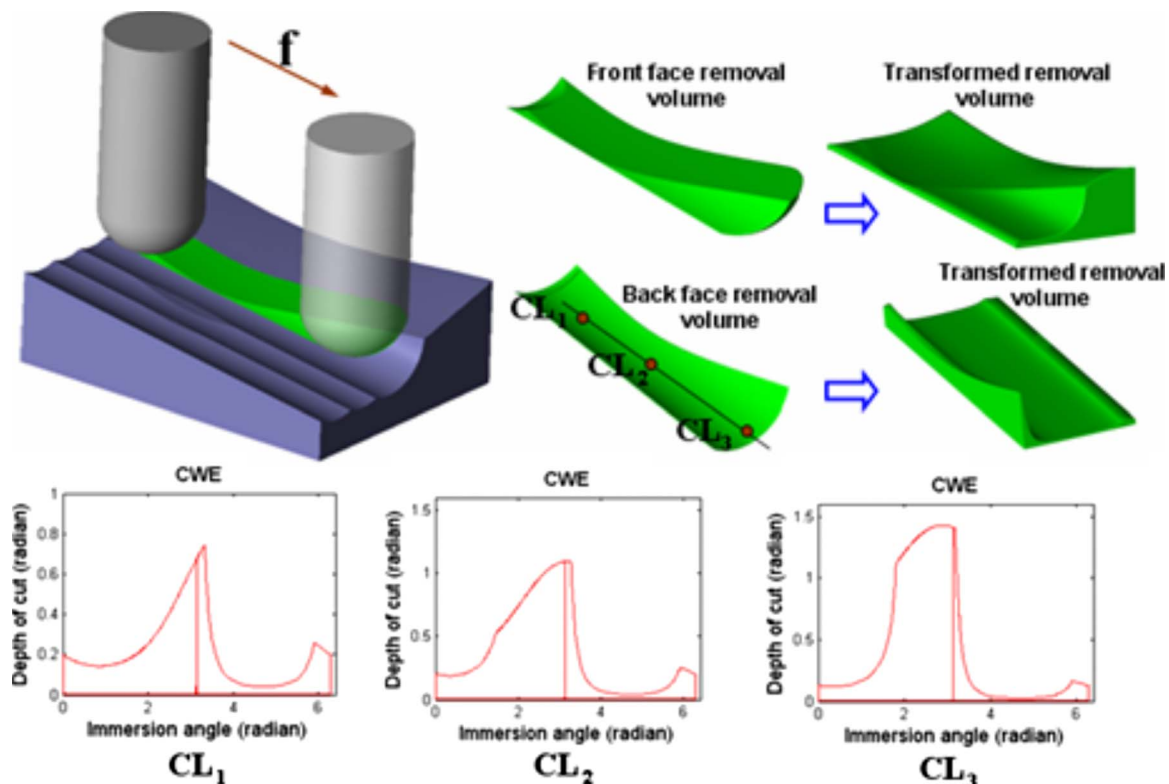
CWEs for ball nose end mill performing a linear three-axis move
